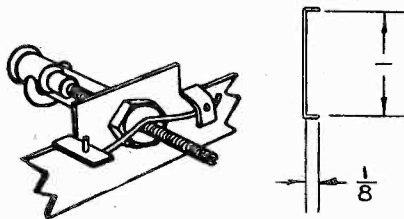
, left, shows the music wire spring applied to the adjusting screw.
